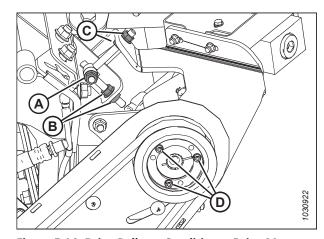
Drive Pulley – Conditioner Drive Motor
